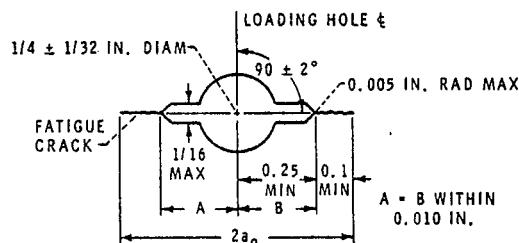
Fatigue crack starter for center-cracked plate specimens.
